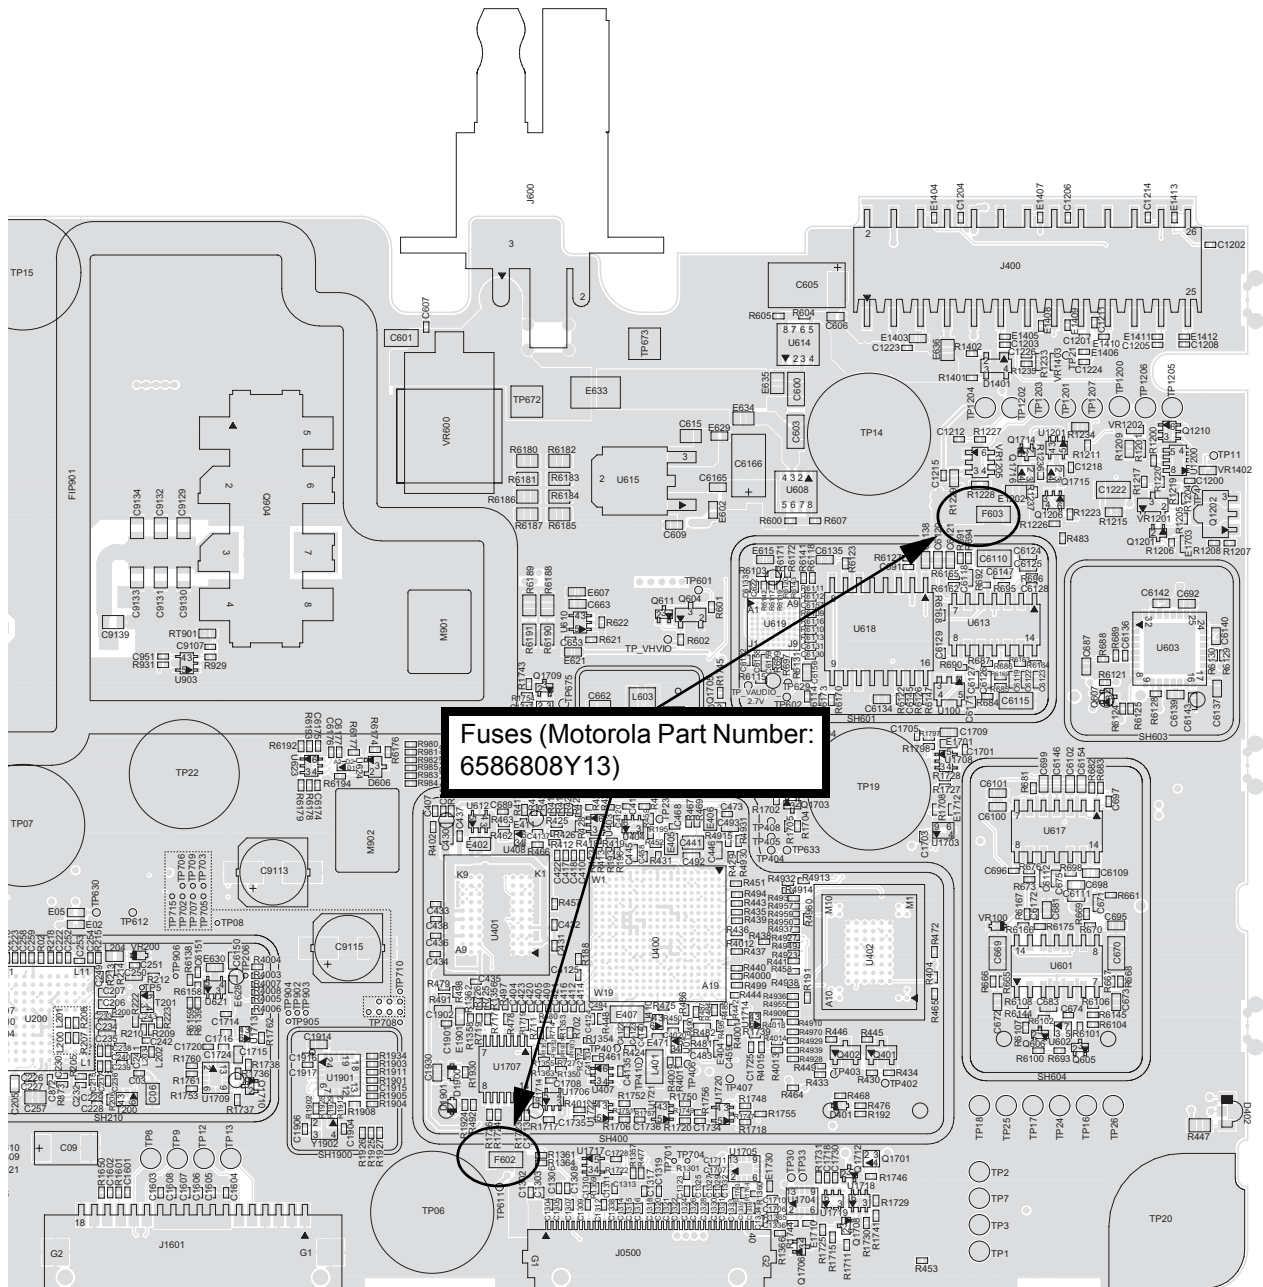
Position of Fuse F602/F603 (PCB Mainboard – TOP View)
